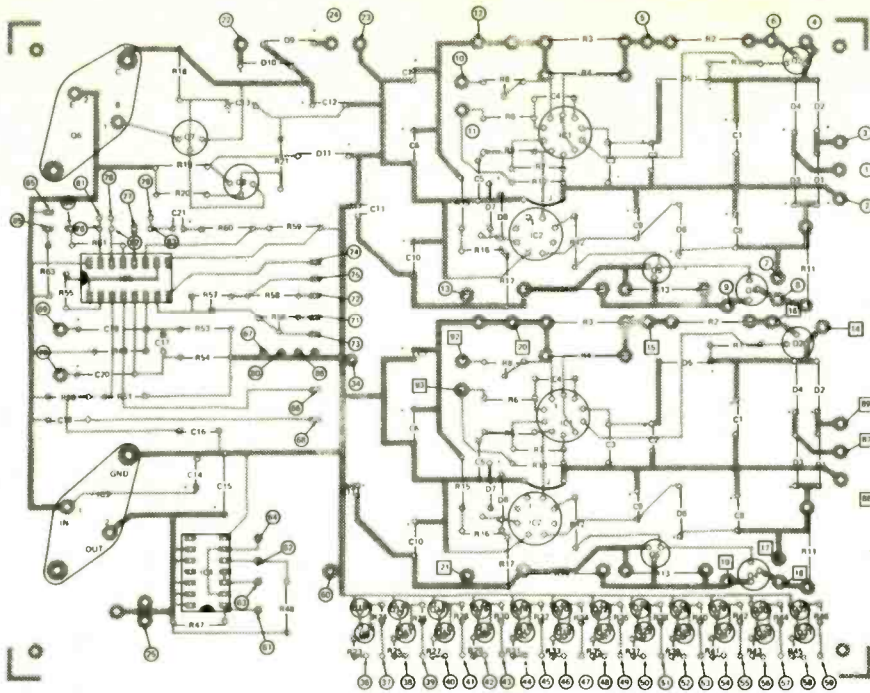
PARTS LAYOUT of circuit board shown from component side of board. Interconnection points are shown with circled numbers. Interconnections for dual power supply #2 is denoted by numbered squares.
